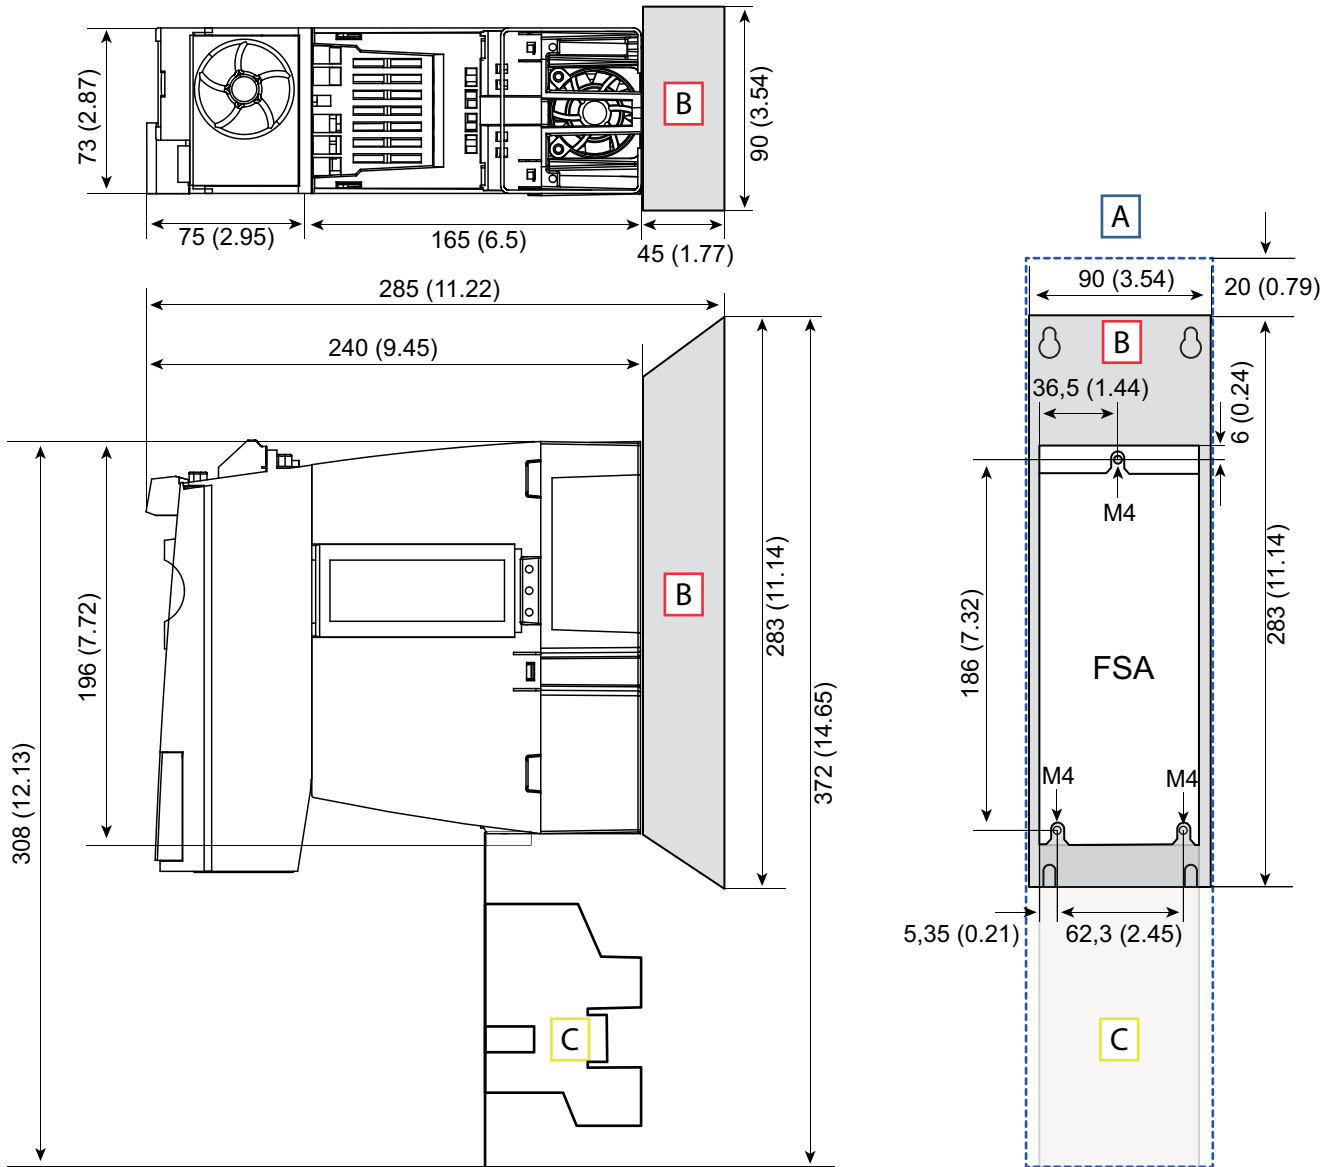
Dimensions of Power Module PM240-2; frame size FSA
